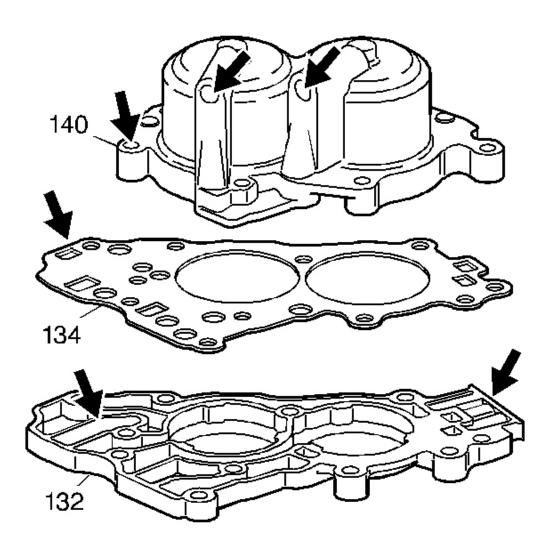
View Of Accumulator Housing, Cover Spacer Plate Assembly & Cover Courtesy of GENERAL MOTORS CORP.
